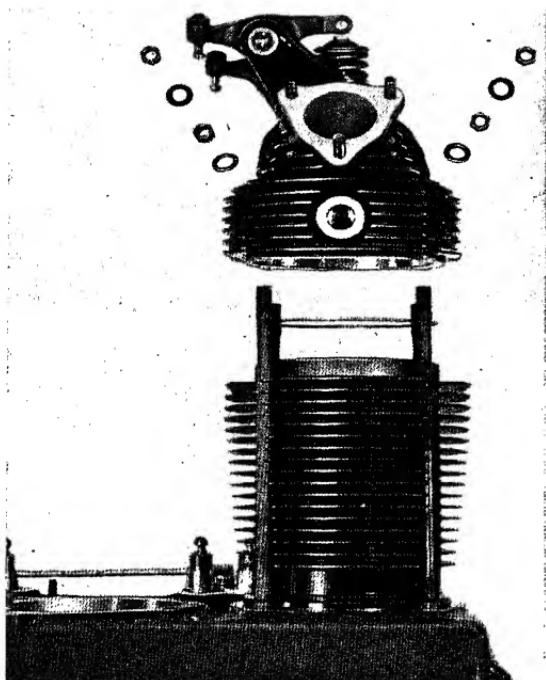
Cylinder assembly. Note gasket suspended between head and cylinder.
